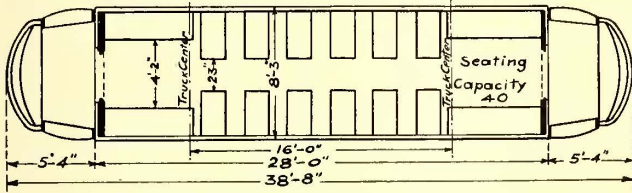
Floor Plan of Standard Double-Truck Car in Philadelphia
